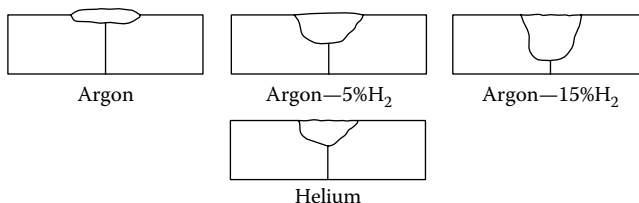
Shielding gas influencing austenitic SS weldment. (From Castner, H.R., *Weld. J.*, April, 53, 1993.)
